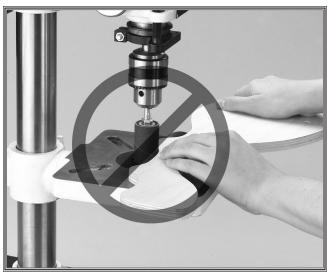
Keep fingers away from spinning drill bits, cutters, and sanding surfaces.
